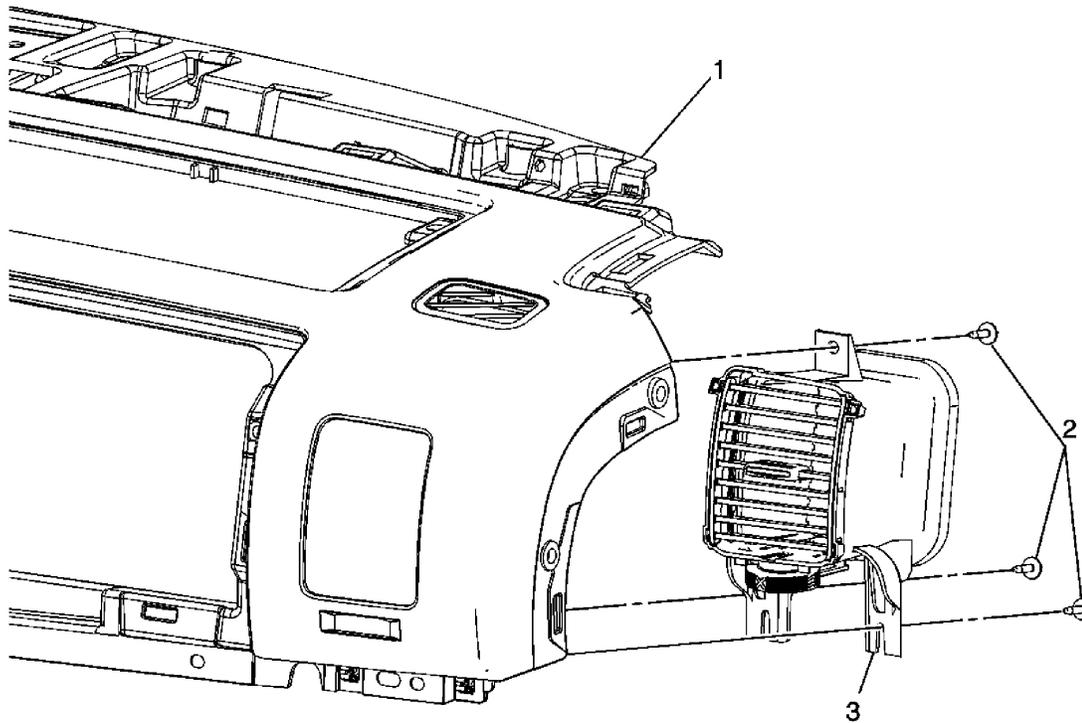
View Of Upper Trim Panel, Air Outlet Assembly & Screws
